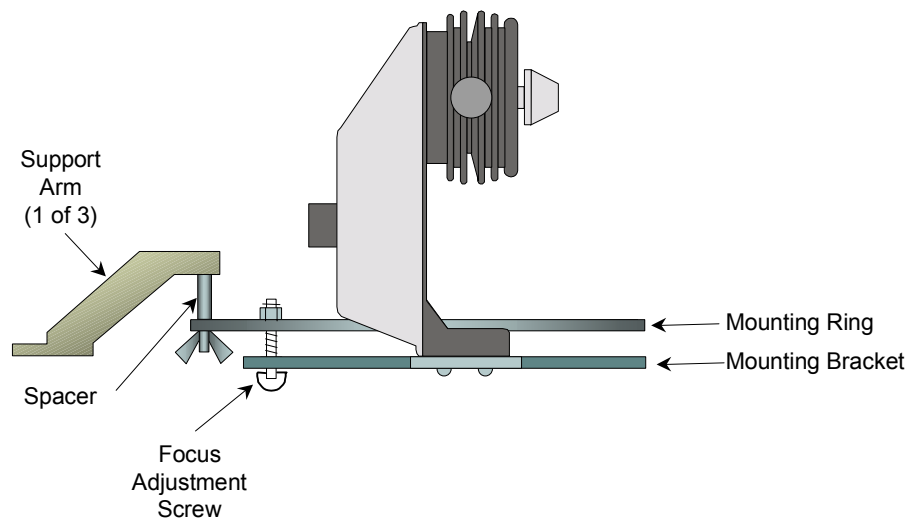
Mounting 120VAC Lampchanger in 250mm Lantern.
